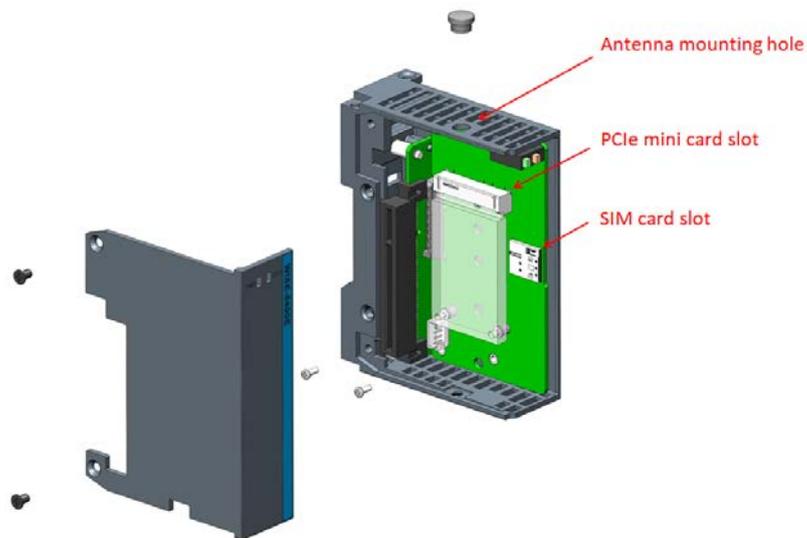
AMAX-5400E PCIe mini card installation guide
